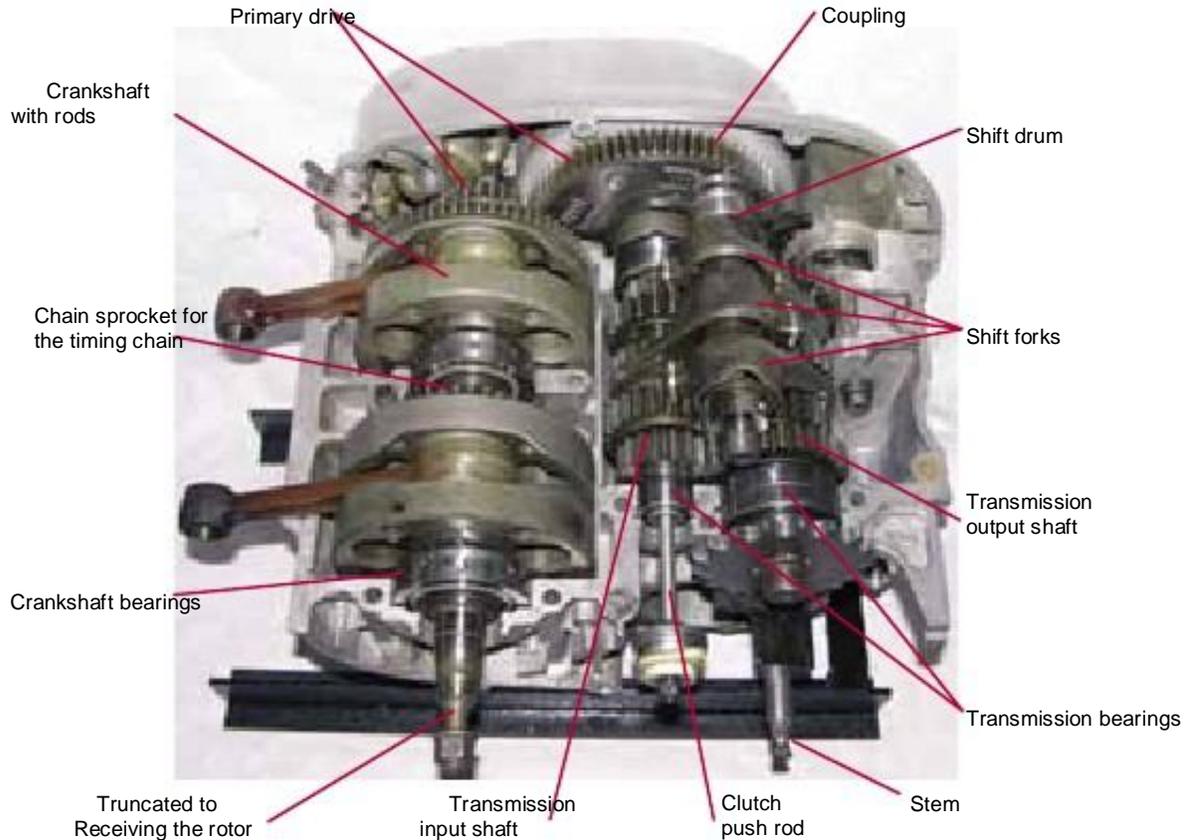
Crankshaft, primary drive, clutch, shift mechanism and transmission
